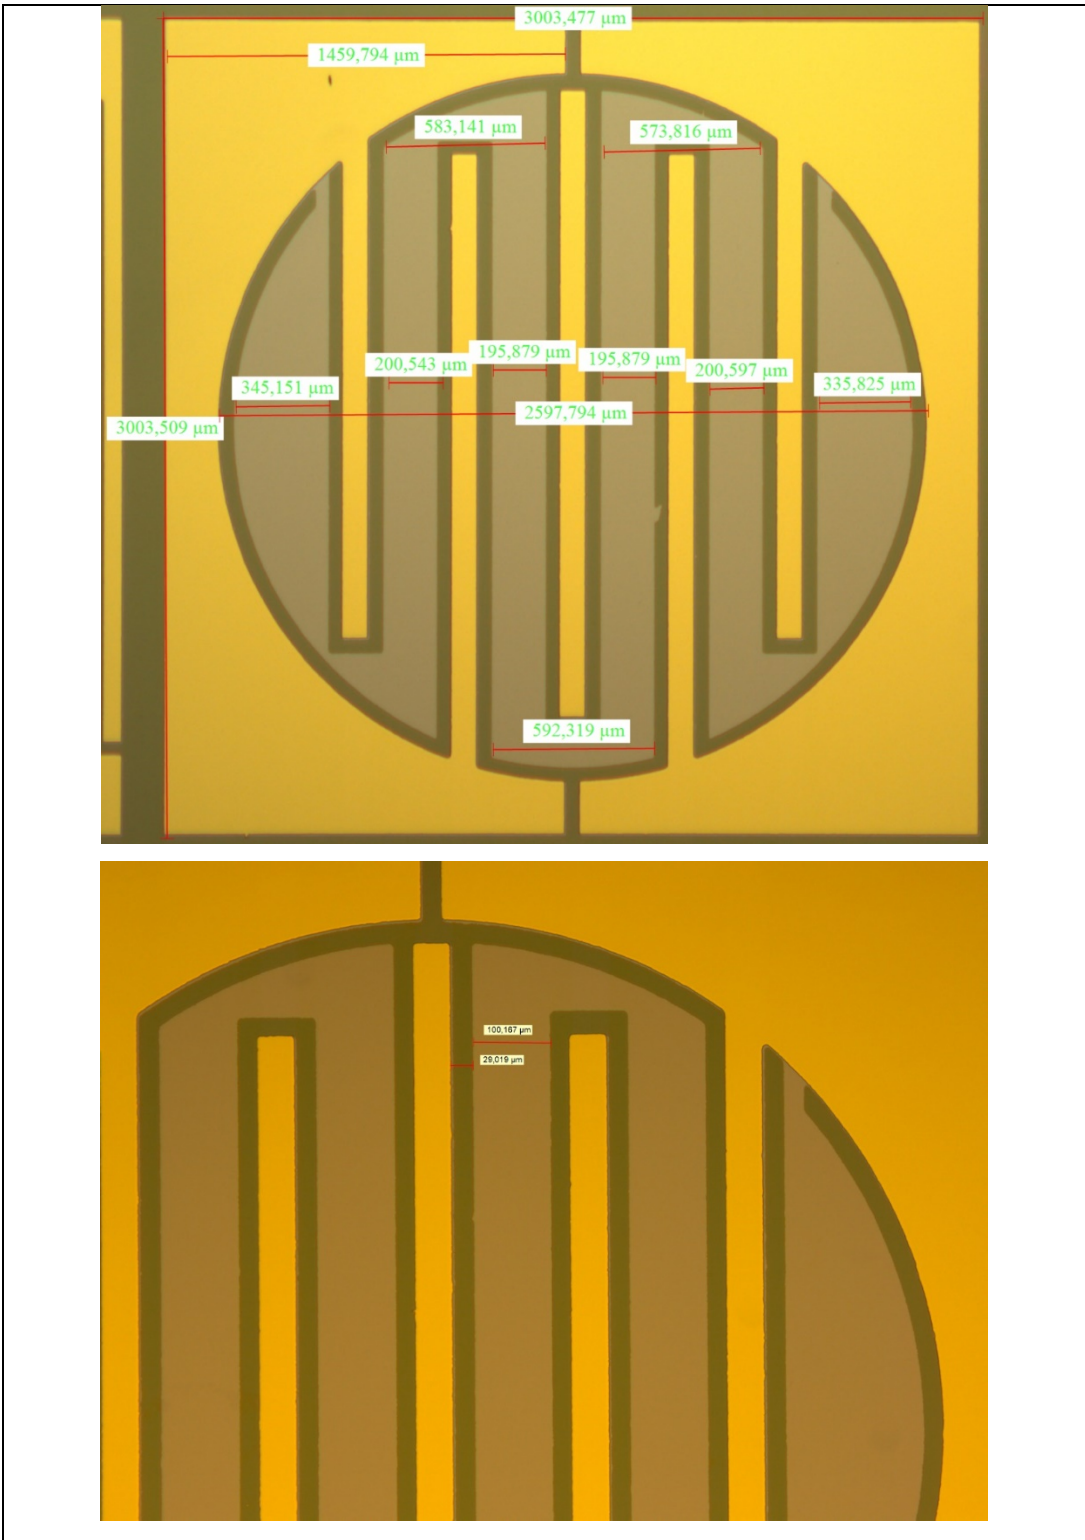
Dimension measurements of fabricated resistor with $50 \mu\text{m}$ line spaces using an optical microscope.
